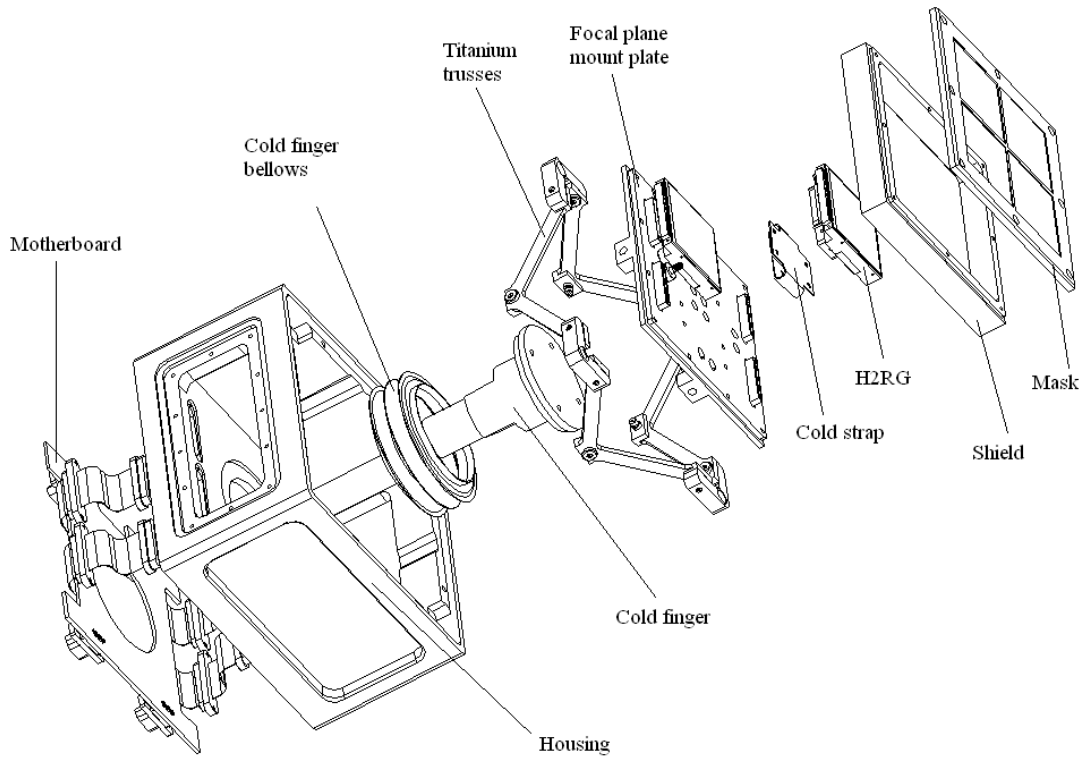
Exploded view of the detector assembly showing the detector and associated components (based on a concept design by Gerry Luppino; GL Scientific).
